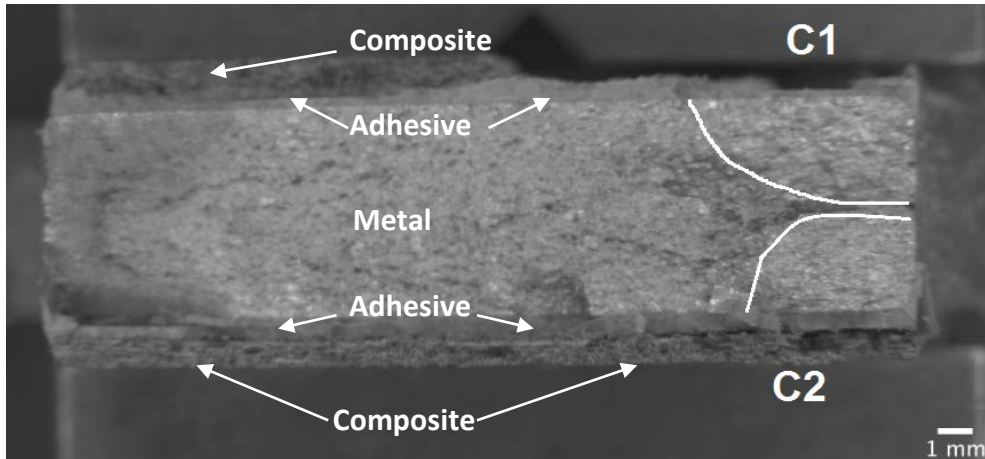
Fracture surface of the repair patched specimen showing the two dominant cracks: Specimen 1 (right-hand side of Figure 6a).
